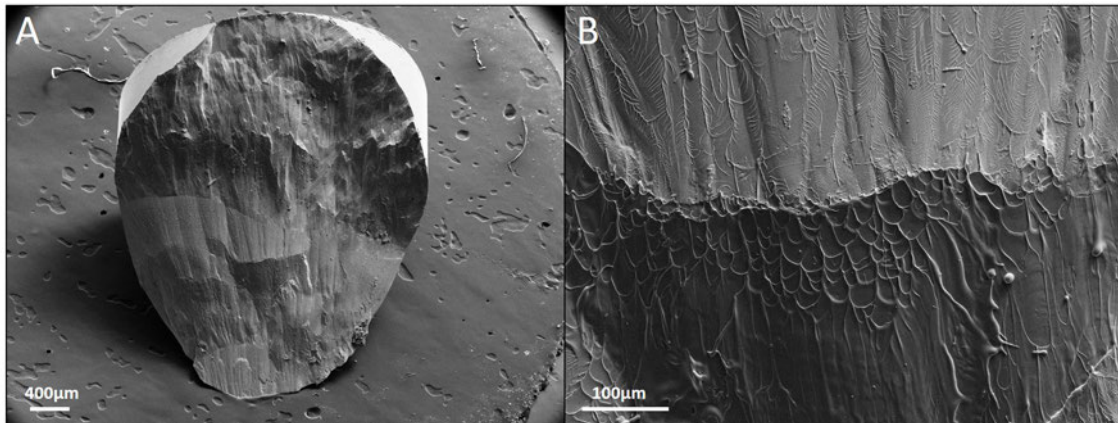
Surface fracture of a compressive test specimen. A is a typical brittle fracture surface. B is typical vein pattern on the same sample.
